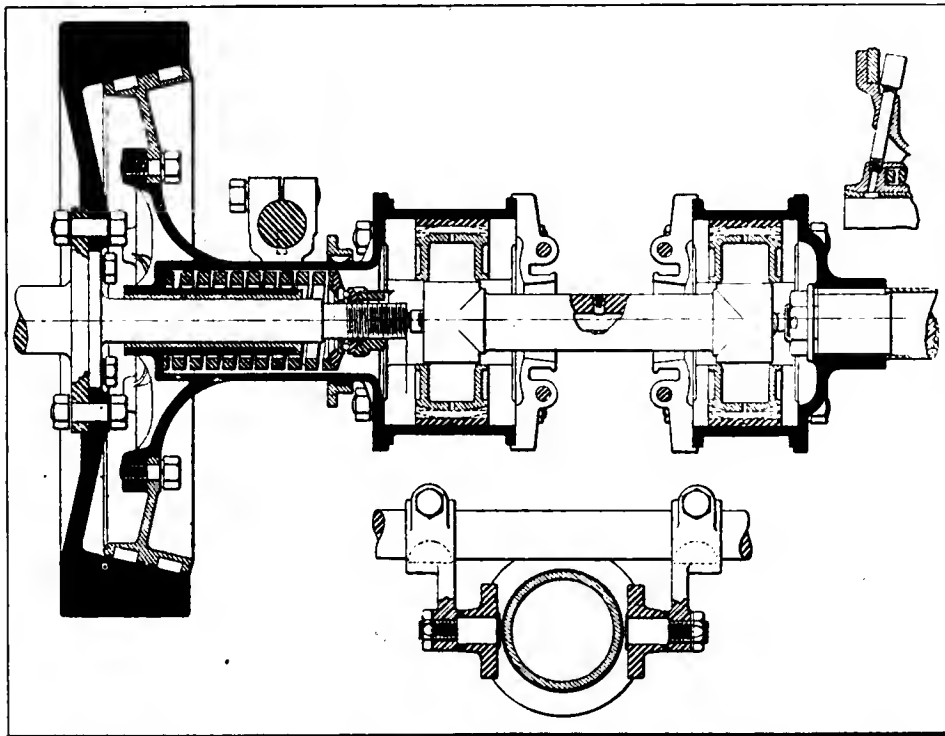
Alden-Sampson cork insert type of cone clutch with full universal joint connection
